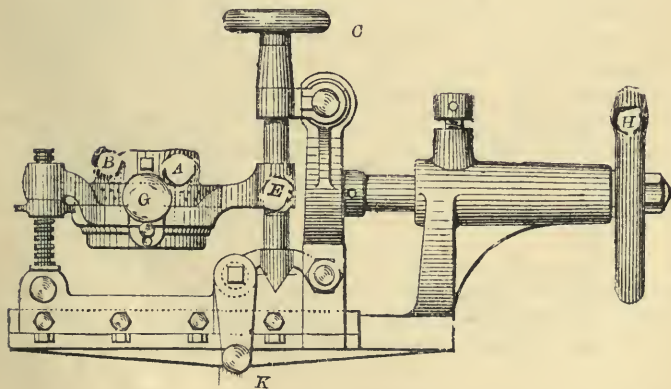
FRONT VIEW OF MILLING APPLIANCE.
